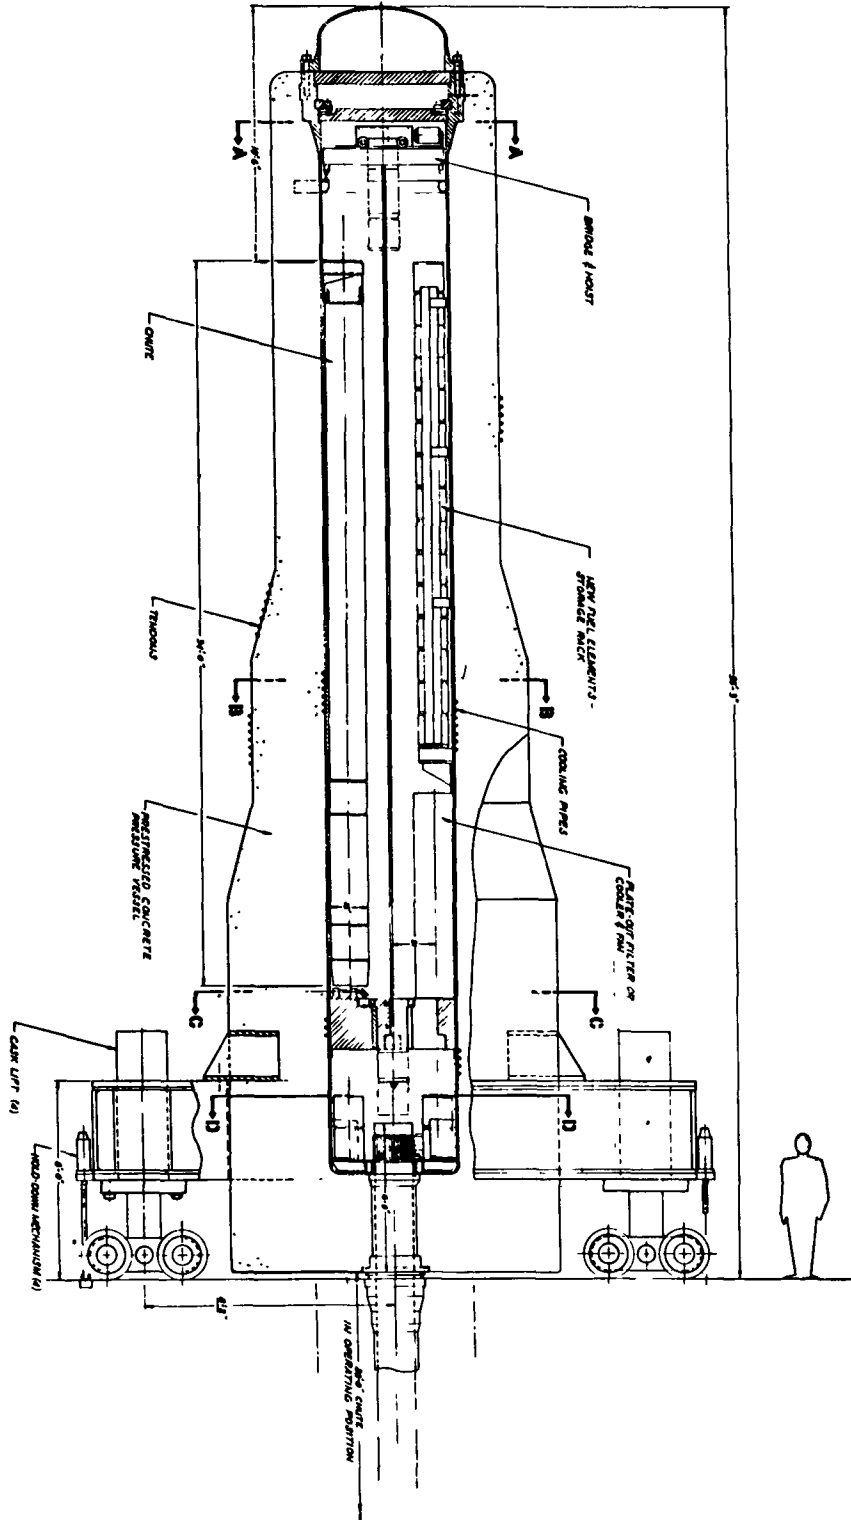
Fuel-Handling Machine for Reference Design. (GGA illustration)
